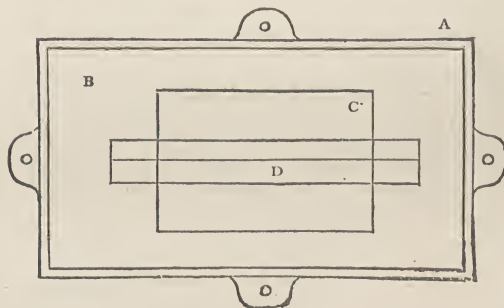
CASTING WITH SQUARE HOLE IN IT.
